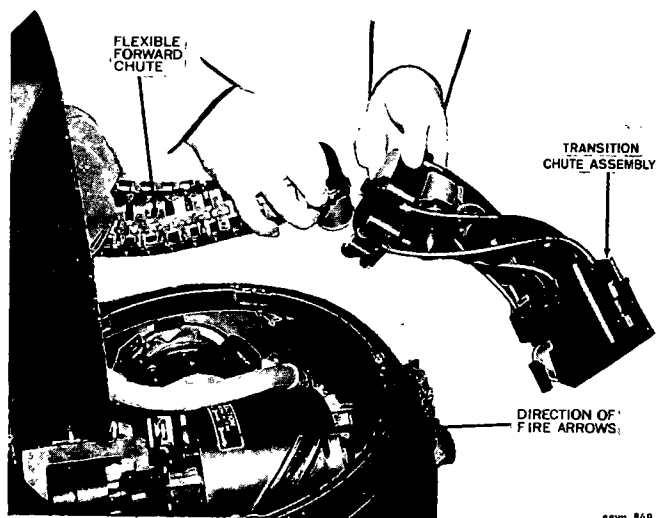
Disconnecting transition chute assembly from flexible forward chute.
